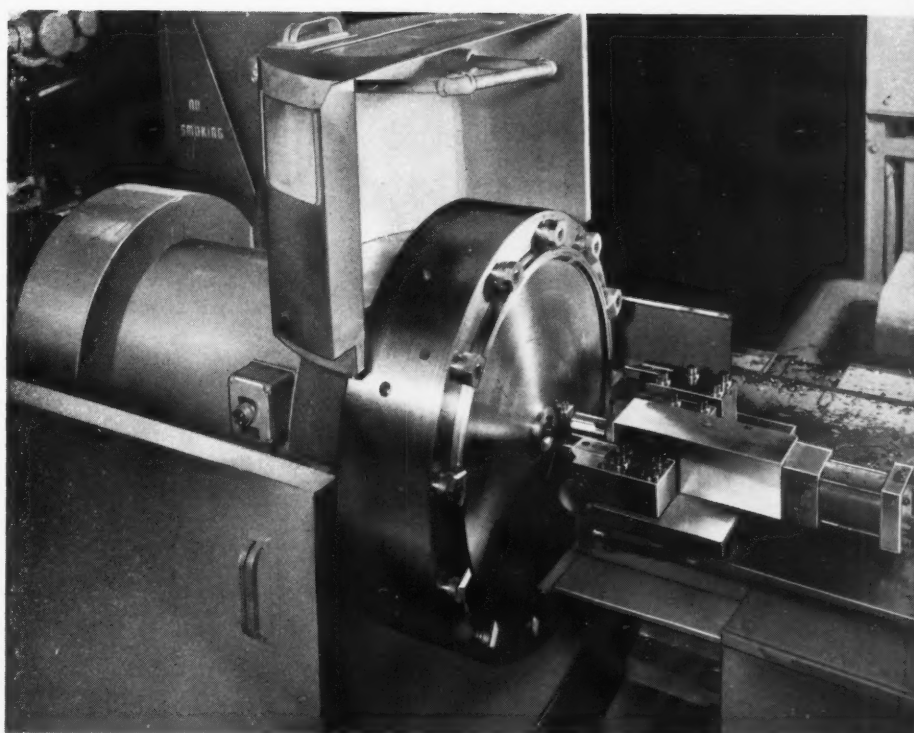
Face-, cylindrical-, and bore-grinding are all performed in a single set-up on the double-wheel hydraulic grinding machine here shown.
